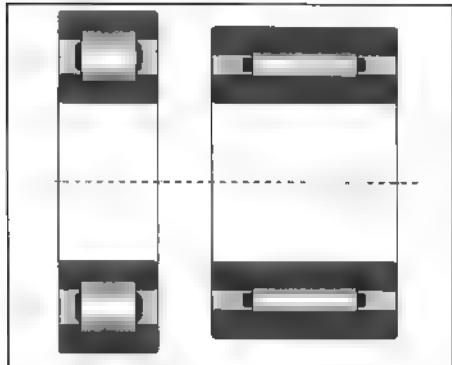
Comparison of the cross-sections, left, of a roller bearing and, right, a needle bearing.
